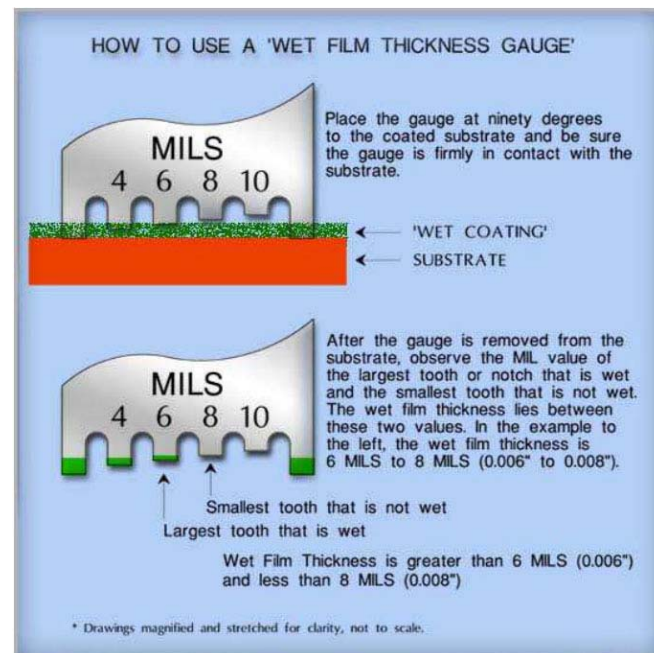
Details on measuring WFT using a notch type wet film gauge. Image courtesy of www.geionline.com
